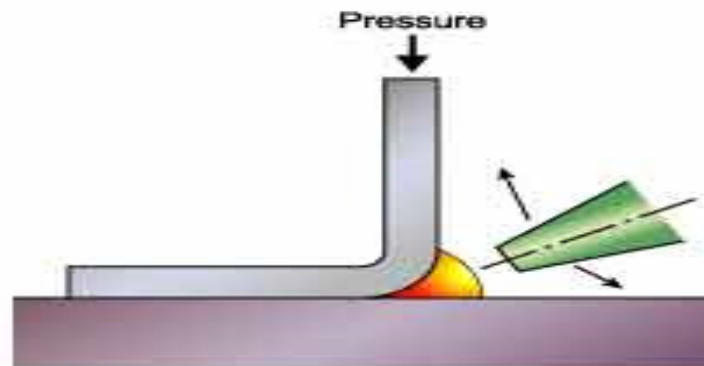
Representing the Hot Welding process overview [TWI Global].
